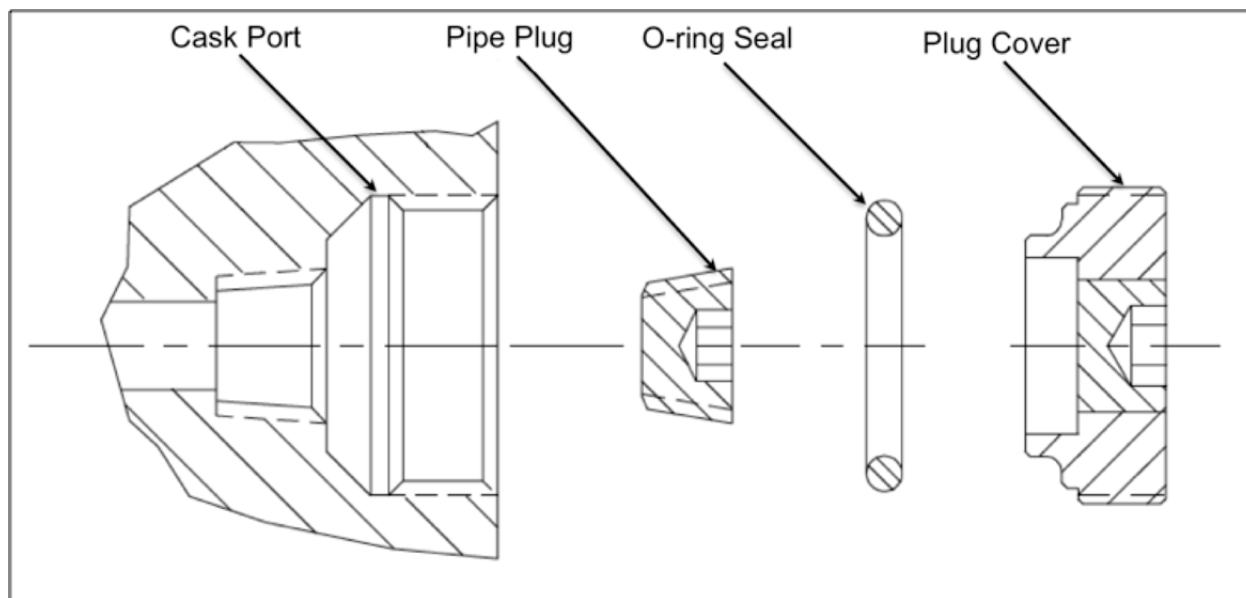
Cask Port Configuration (Exploded View)
